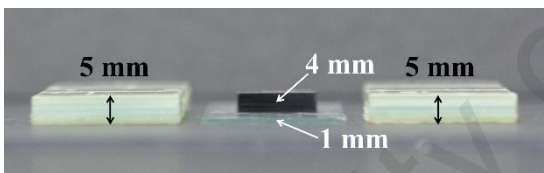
Side view of the assembled Perspex[®] mould on top of the 1 mm glass slide
